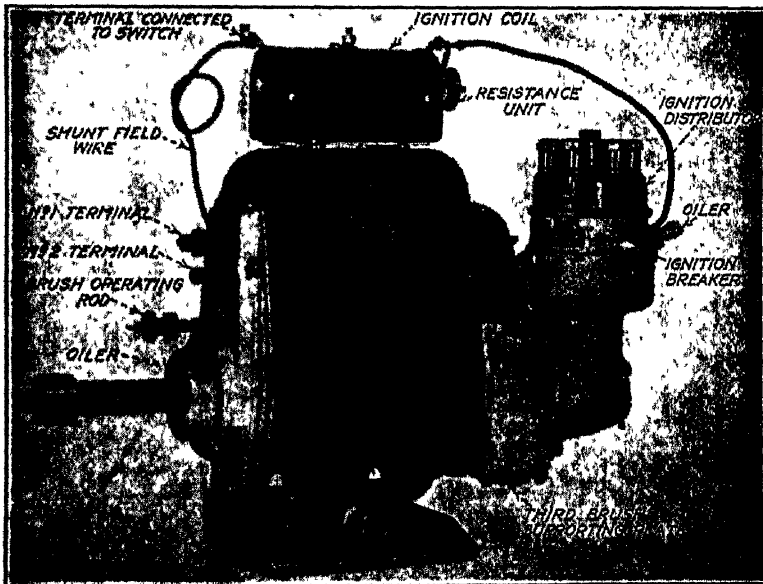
Deleco ignition equipment mounted on motor-generator for Buick Six.
